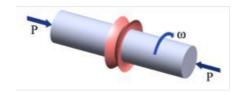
Rotary Friction Welding (RFW), (Li, et al, 2012)
